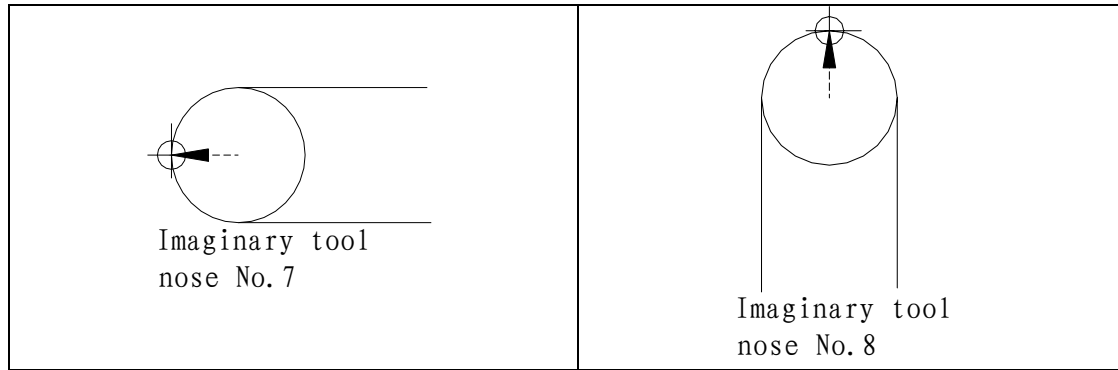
Imaginary tool nose number in front tool post coordinate system
